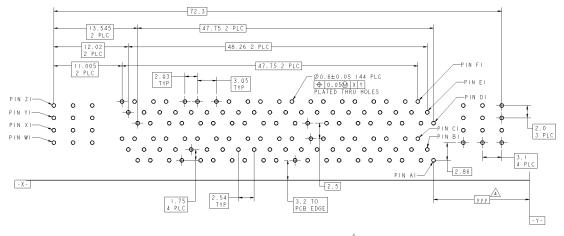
Z-Dok+ Device Interface Mating Connector Layout and Footprint
